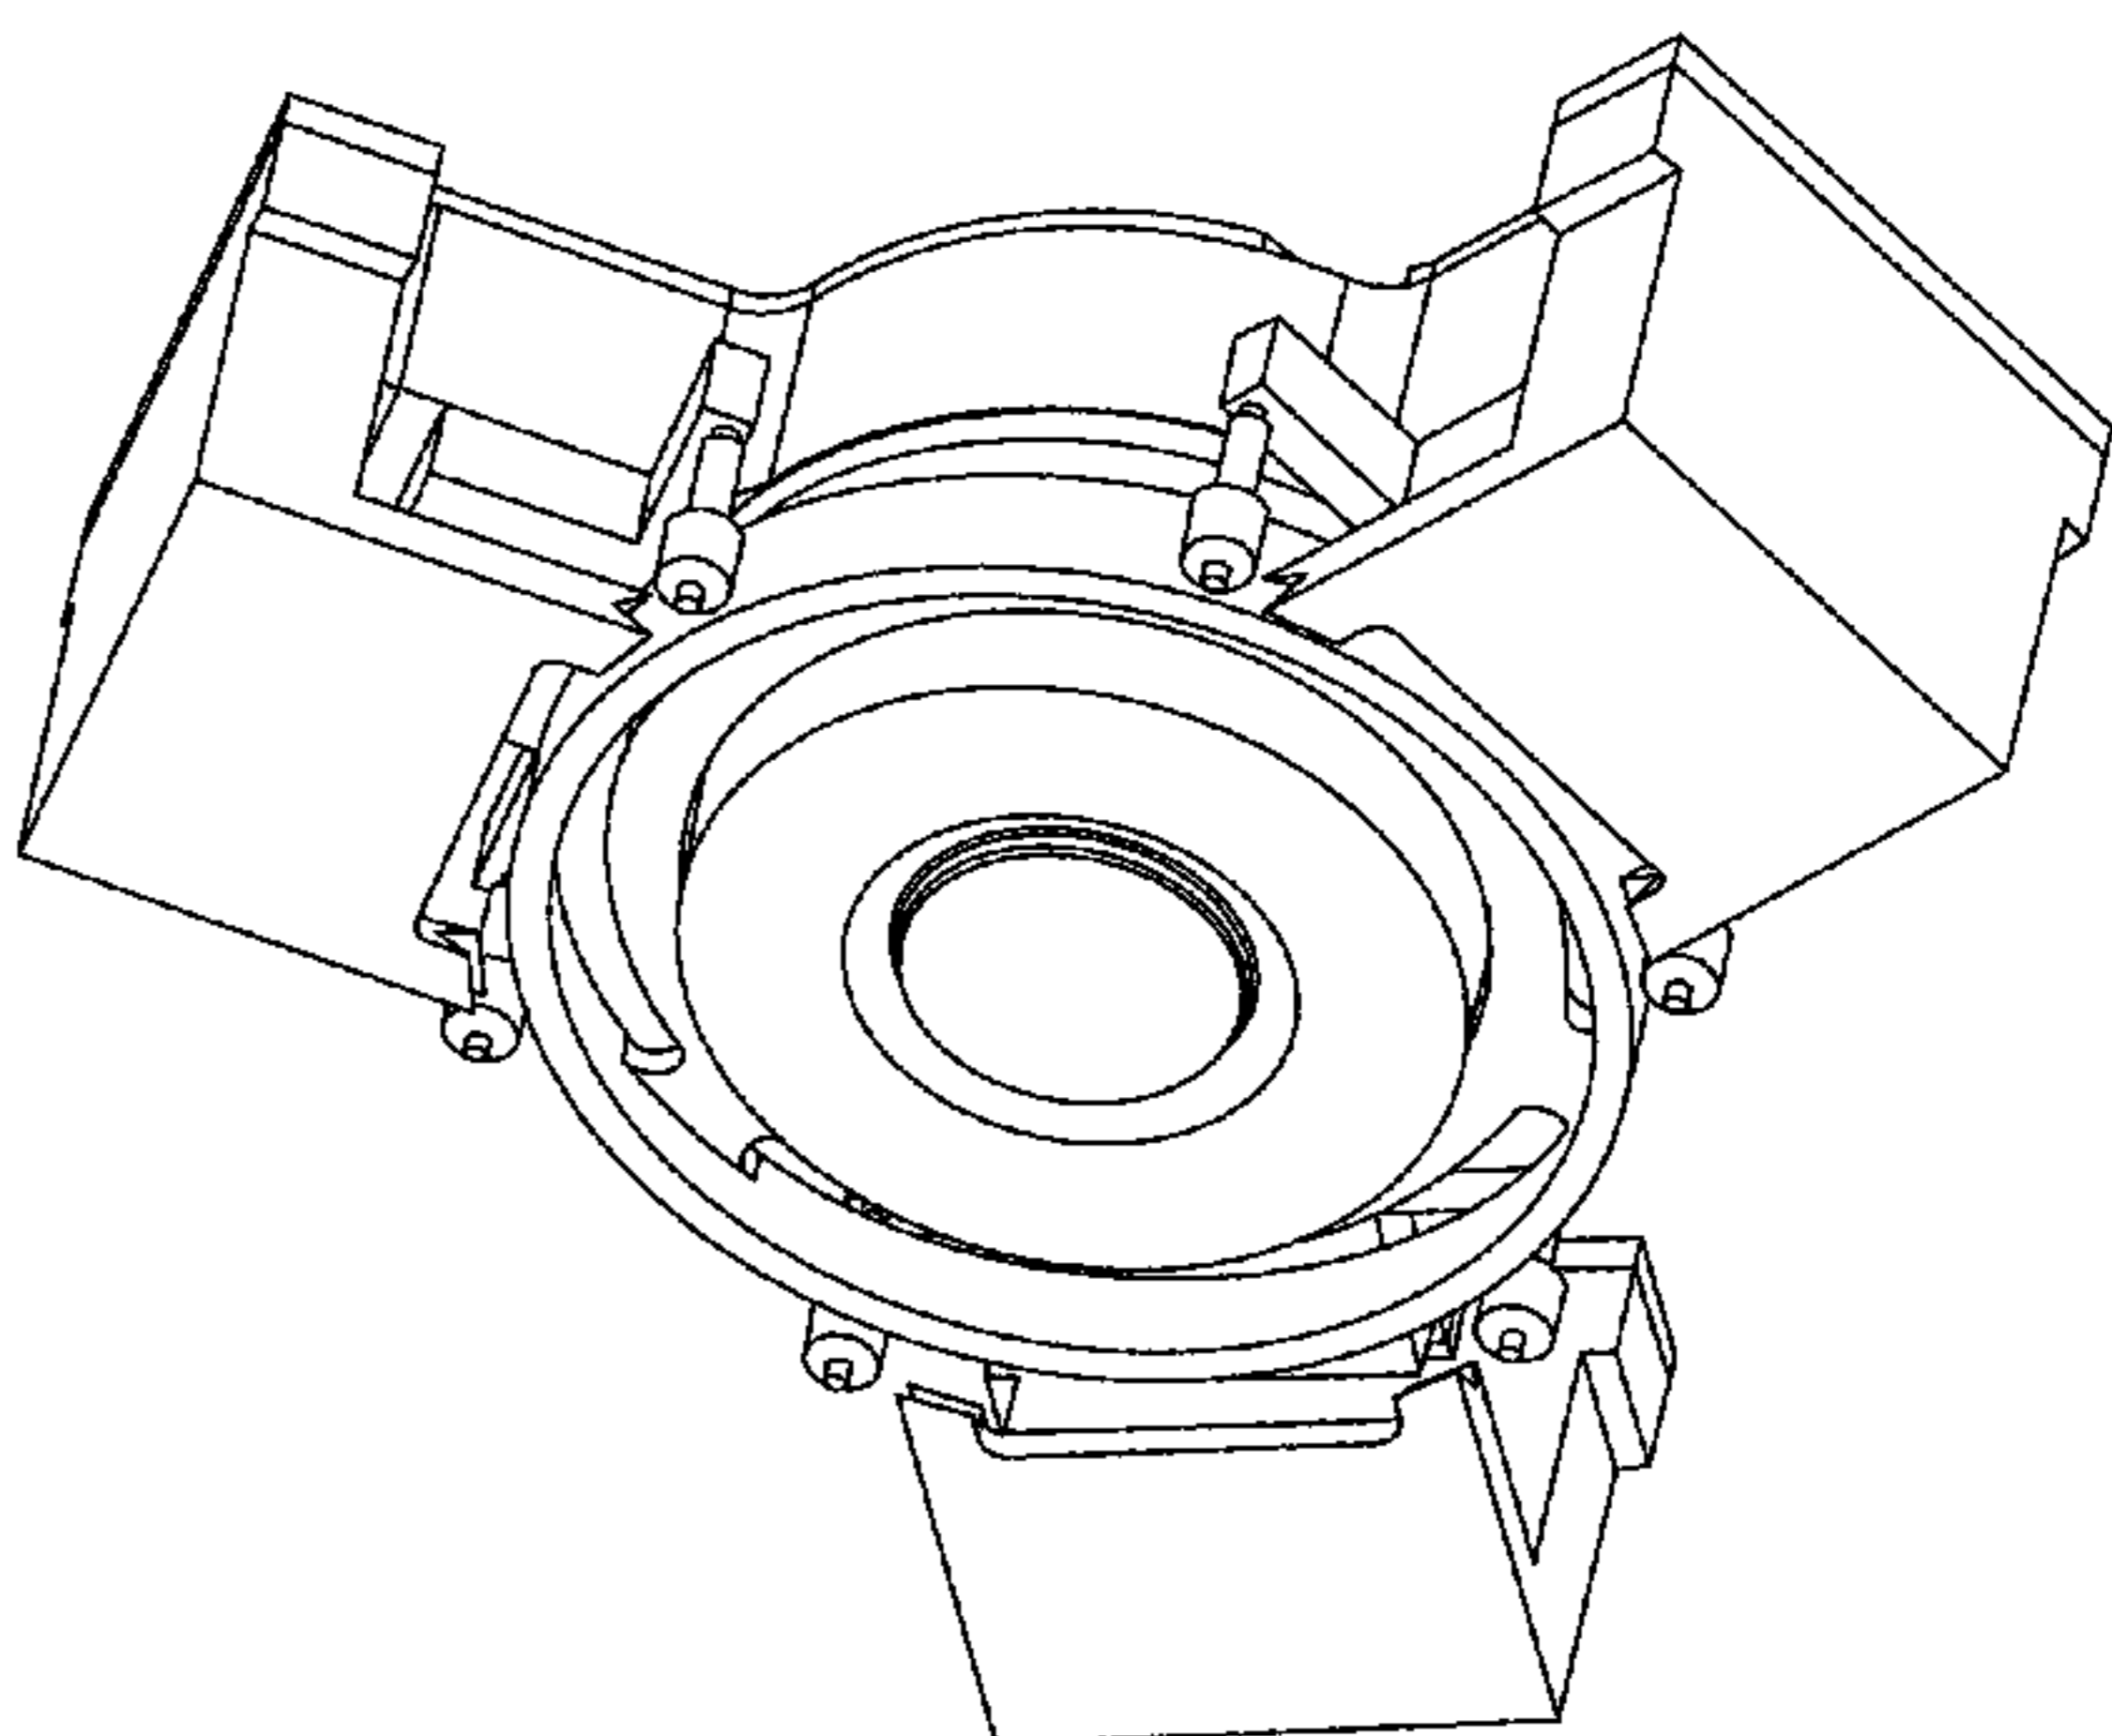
is a bottom perspective view of the wafer handling assembly of FIG. 21.
